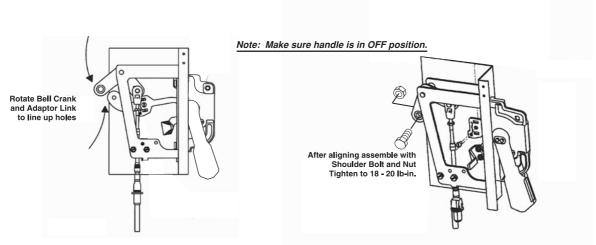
Assembly of Adapter Link to Bell Crank Using Shoulder Bolt
